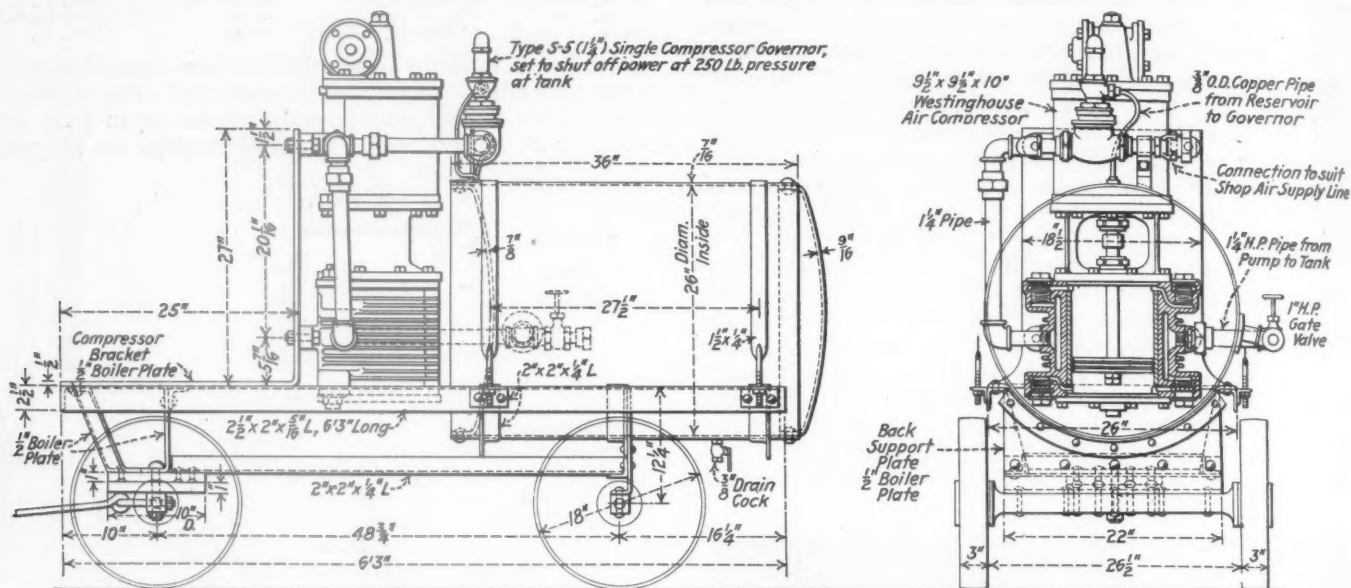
Portable Air Compressor Gives the Added Pressure Needed in Driving Out Bolts and on Heavy Riveting Work
